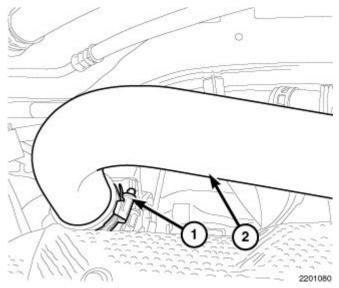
Charge Air Cooler Inlet Hose Courtesy of CHRYSLER LLC
